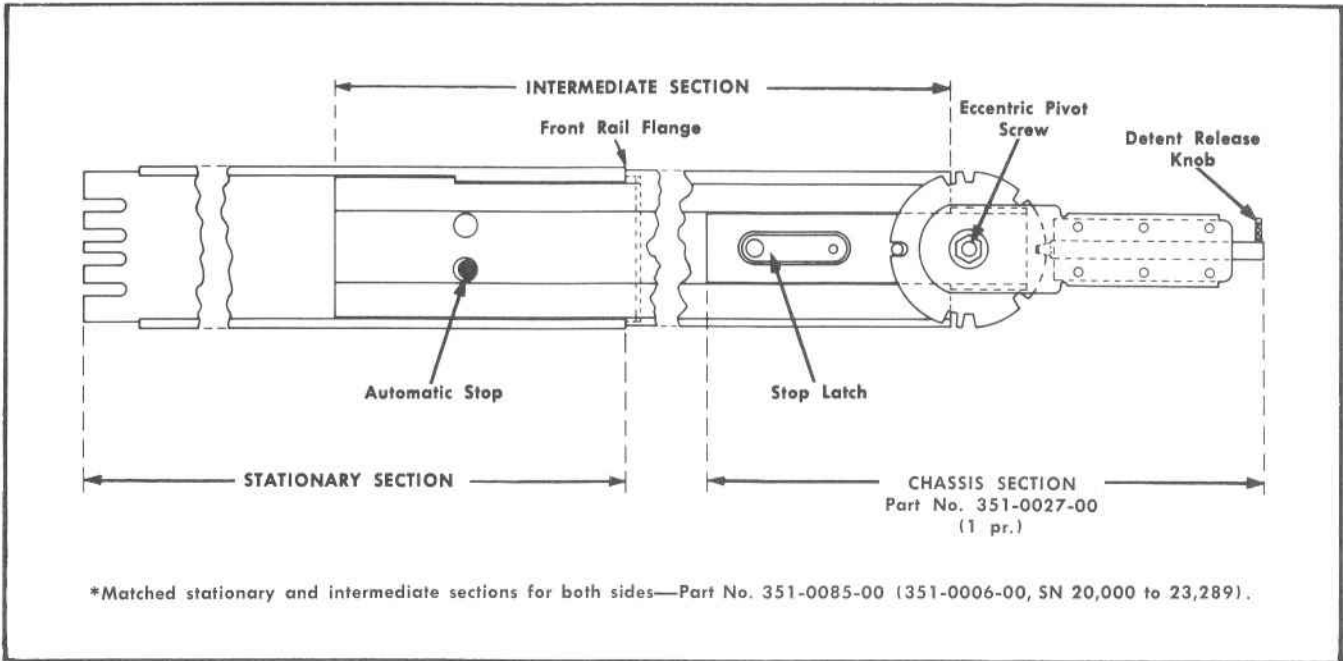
Illustration showing the slideout track assembly for the right side.
